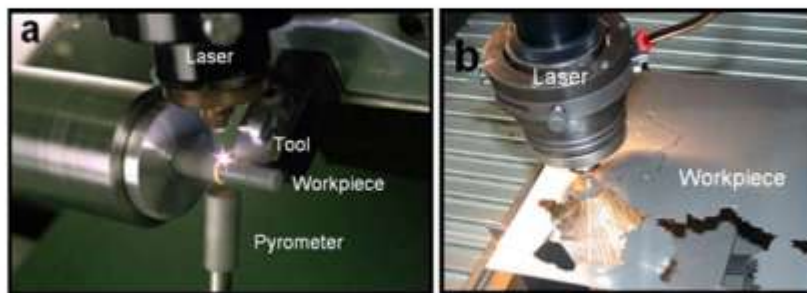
(a) Laser assisted machining. (After Lei et al.<sup>35</sup> with permission. Copyright Elsevier.) (b) Laser machining.<sup>35</sup>
